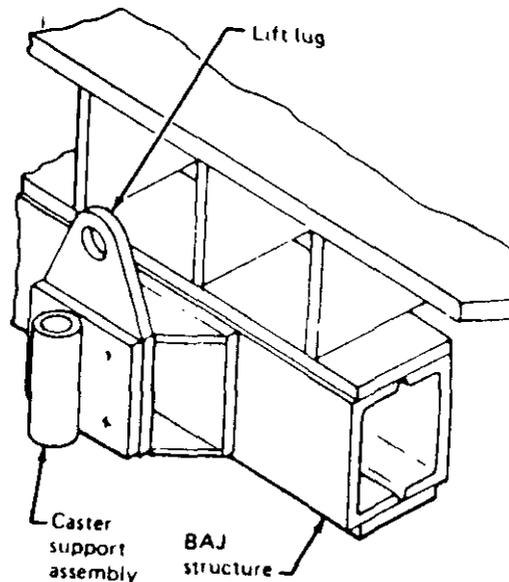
(a) Typical lift lug combined with caster support assembly.
